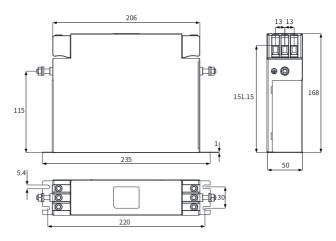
Filter dimensions (FN3288-40-33) (unit: mm)
